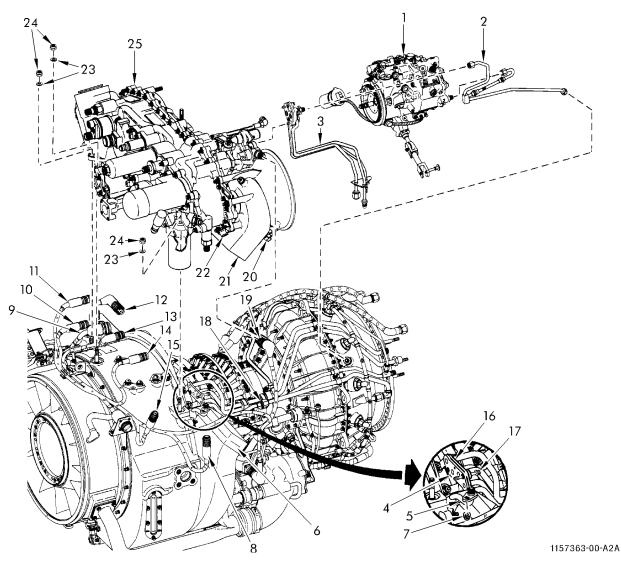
(T700) Accessory Section Module; Removal and Installation
